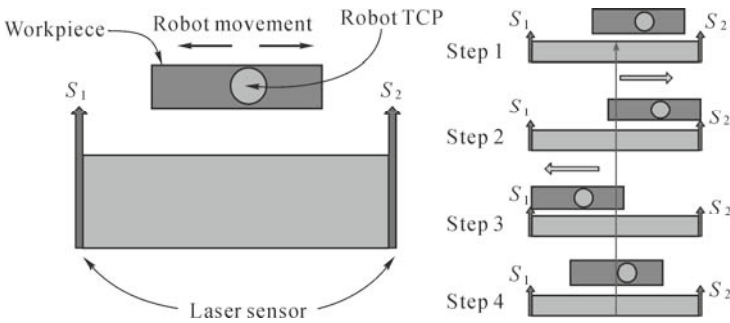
Illustration of centering principle by using laser sensors mounted on the fixture
